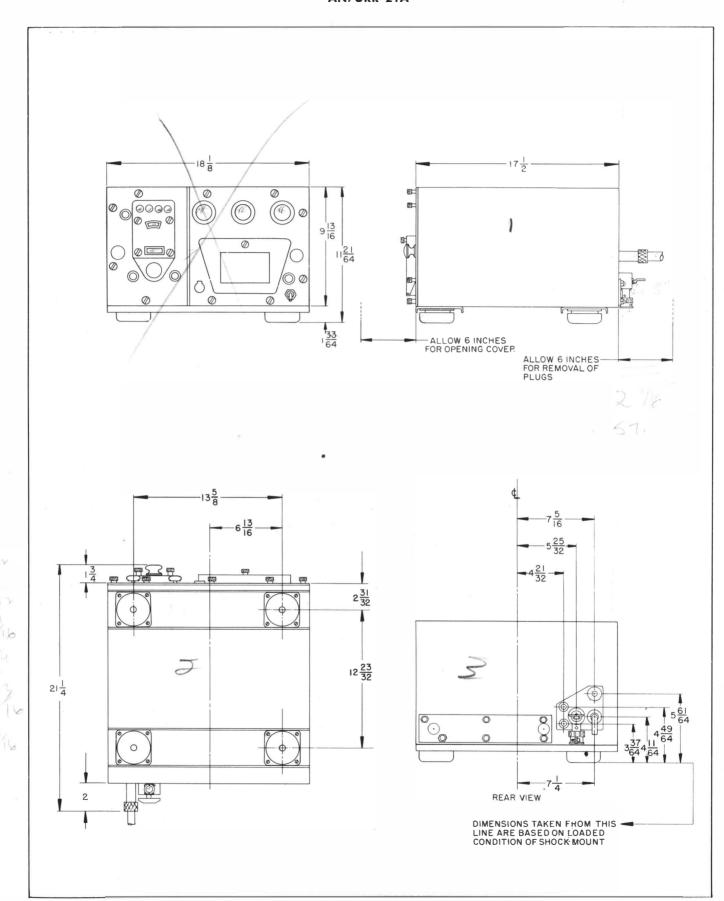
Radio Receiver R-432A/URR-21, Outline Drawing
